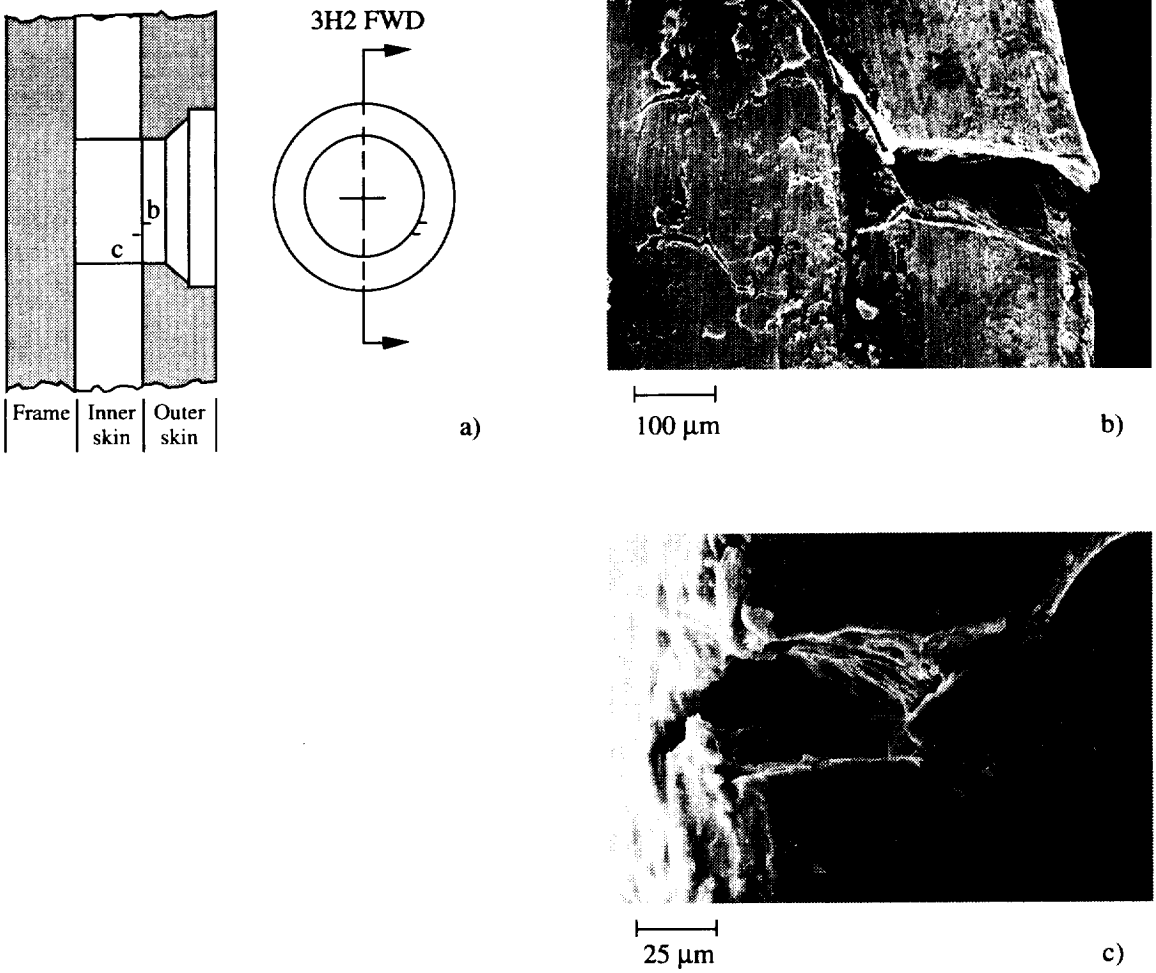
a) The schematic shows the rivet hole 3H2 configuration and the location of two fatigue cracks, (“b” and “c”) oriented in the forward direction and about the 4 o'clock position. Crack “b” is located at the outboard corner of the inner skin and crack “c” is located at the inboard corner of the outer skin rivet hole. b) The SEM micrograph shows the partially opened inner skin fatigue crack “b” shown in Figure 9.40.a. c) The SEM micrograph shows the partially opened outer skin fatigue crack “c” shown in Figure 9.40.a.
